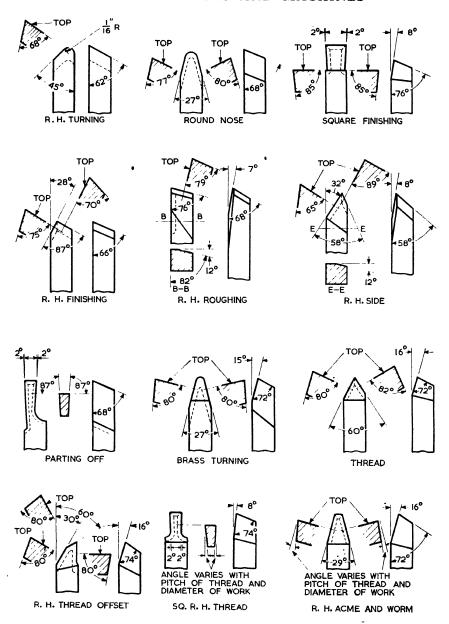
CORRECT CLEARANCES AND CUTTING ANGLES FOR INSERTED LATHE TOOLS
